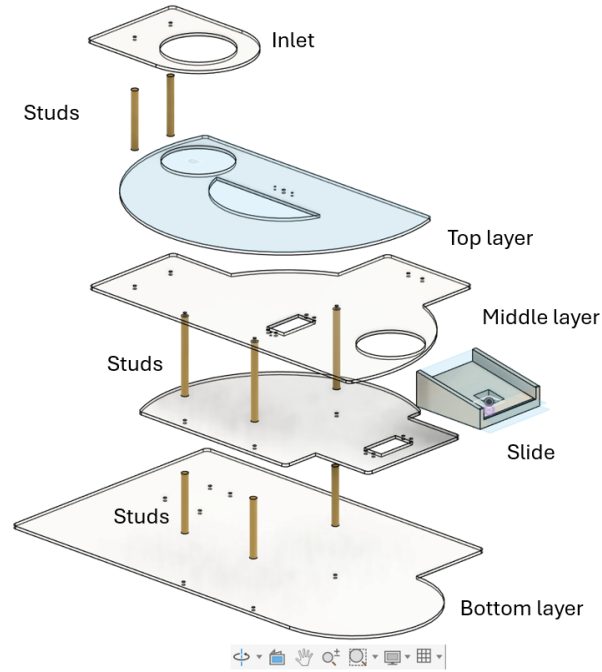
Exploded view of the mechanical structure, showing the inlet, top layer, middle layer, bottom layer, slide, and support studs.
